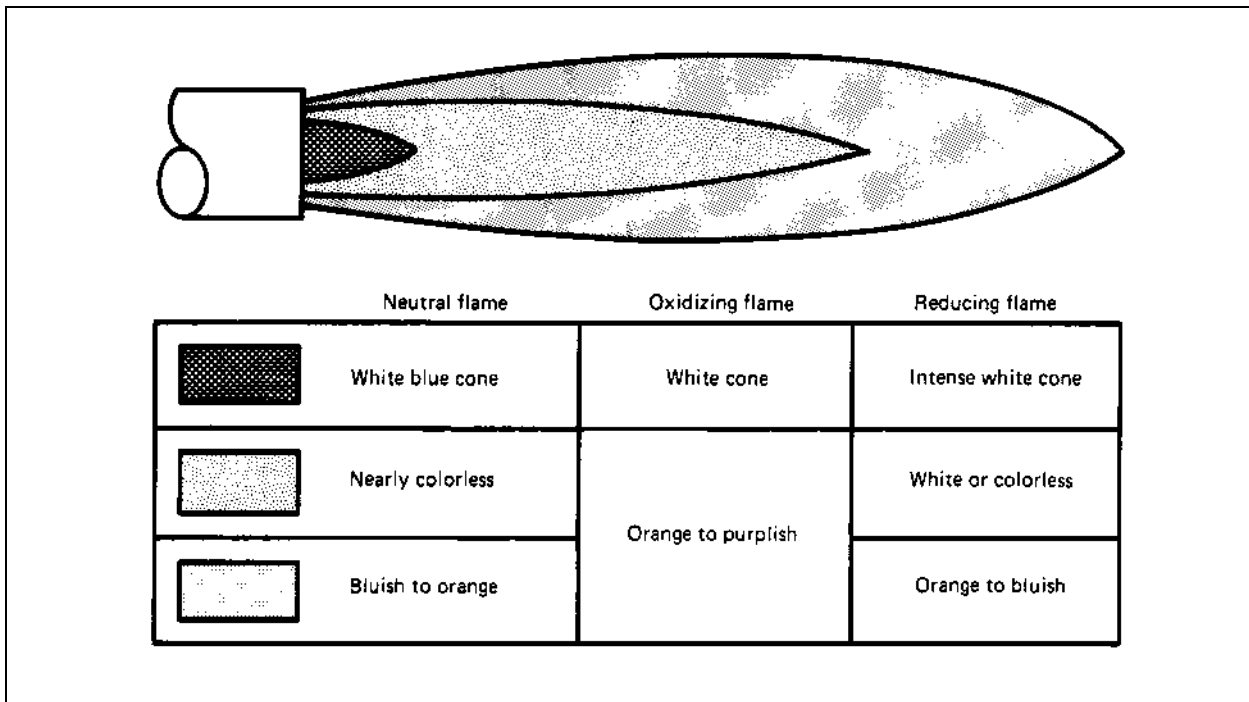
Oxyacetylene Flame (Courtesy of the American Welding Society)
